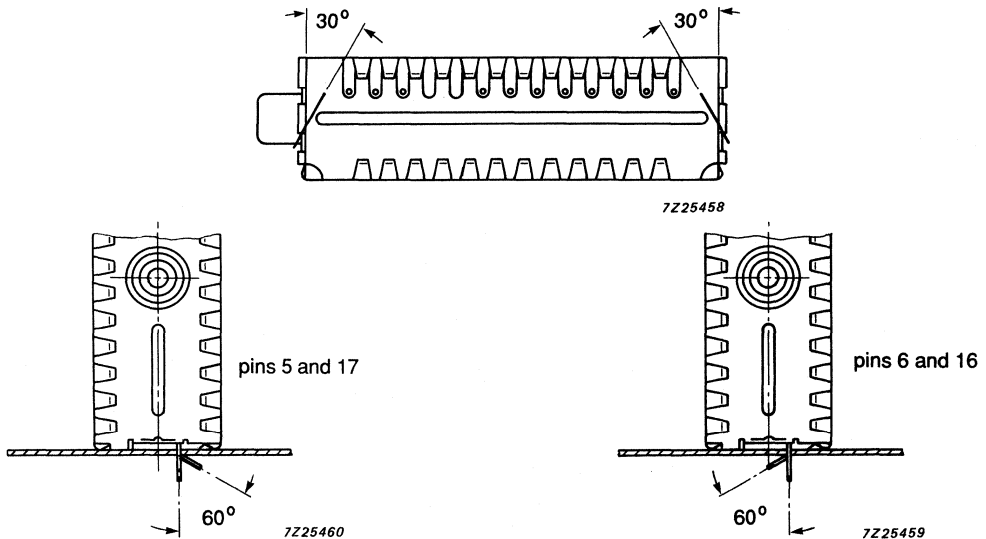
Piercing diagram viewed from solder side of board; unless otherwise stated the tolerance is $\pm 0.05 \text{ mm}$.
